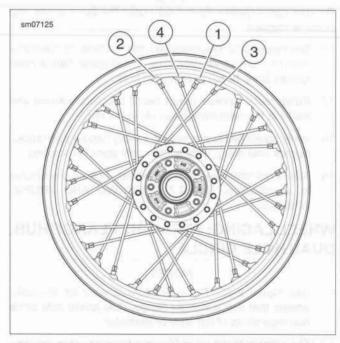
32-Spoke Single Row Straight Flange Hub
